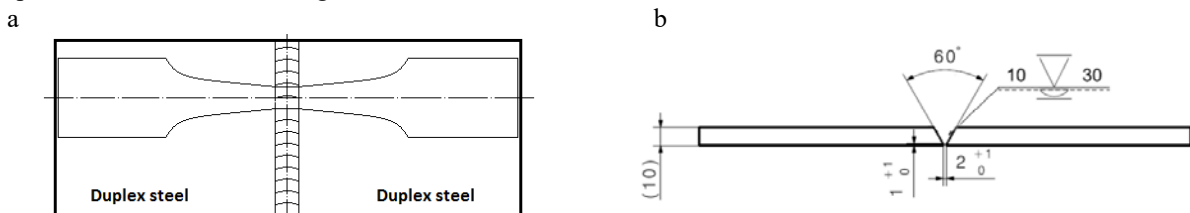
(a) Specimen orientation at the weld joint; (b) dimensions of the weld type
